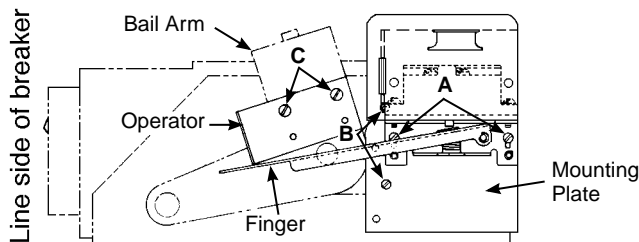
Mounting to Class 9422 Types RN1 and RP1 Circuit Breakers
